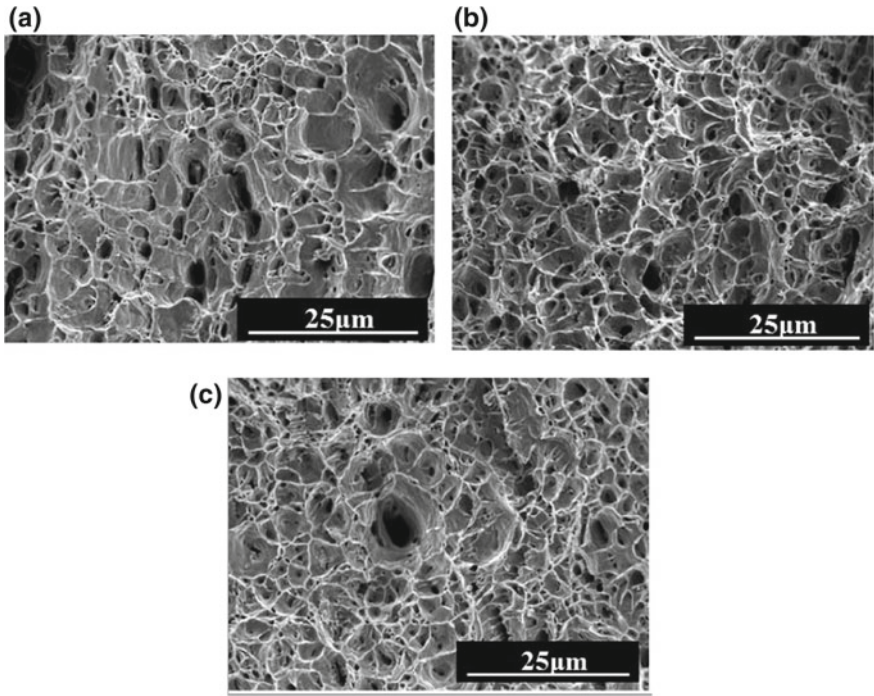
Fracture surface of the cold rolled and annealed samples: a cold rolled 50%, b 580 °C, and c 660 °C/15 min
